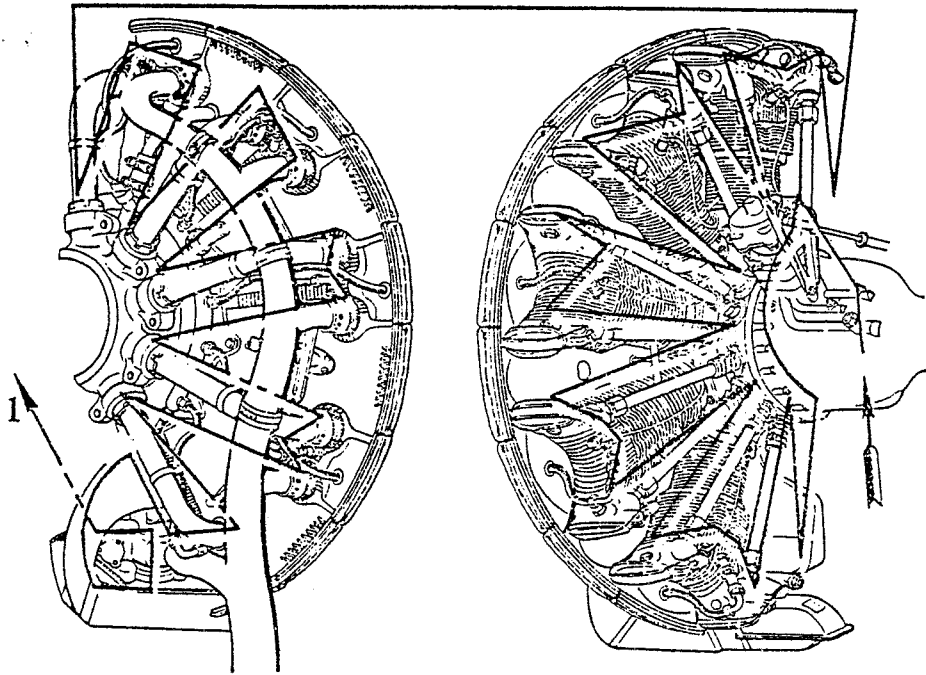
Inspection Circuit for Engine Front Right Side
